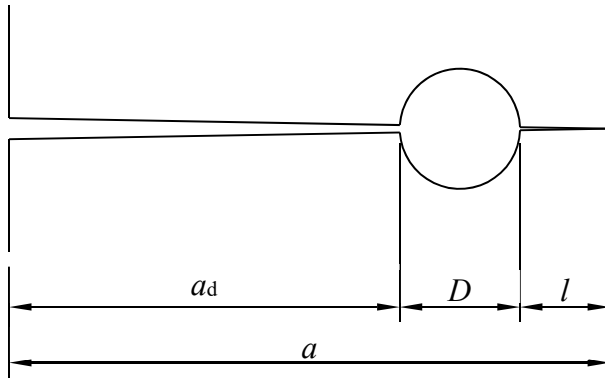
Fatigue crack re-initiated from stop hole
